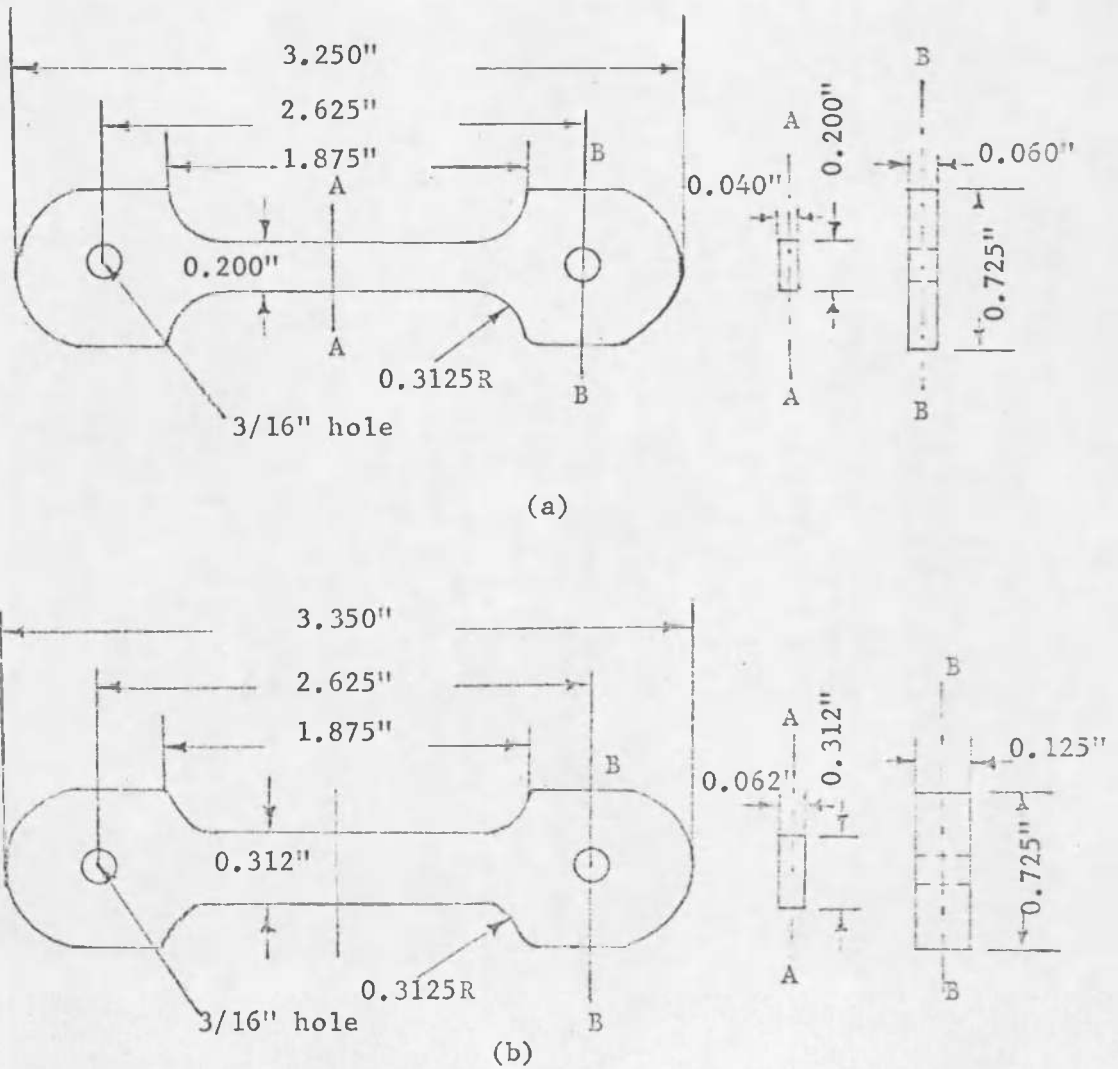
Dimensions of Flat Tensile Specimens (a) Cu-20 w/o Zn, (b) Al-6061
